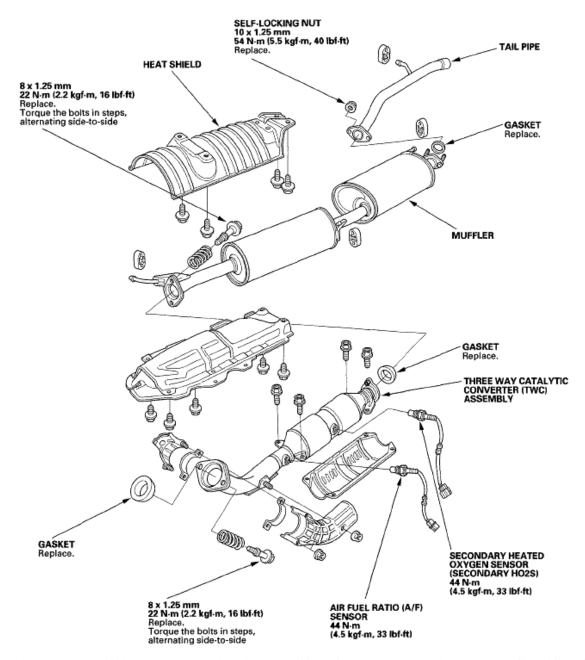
Identifying Exhaust Pipe And Muffler Components With Torque Specifications Courtesy of AMERICAN HONDA MOTOR CO., INC.
